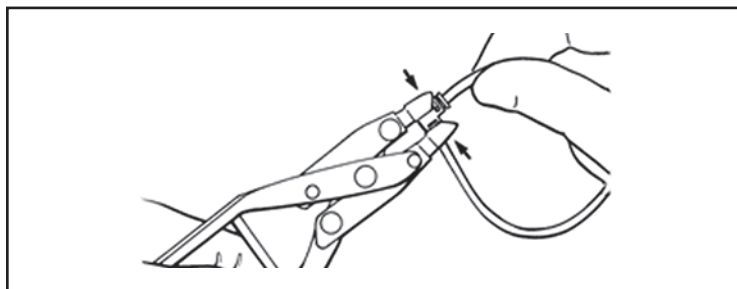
Use the tool twice when using a right-angle connector - once on each connector end
